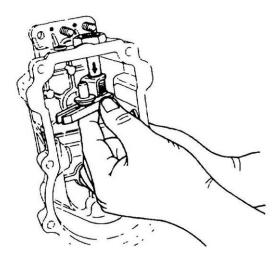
Removal of the Control Lever Shaft and Floating Lever Assembly
